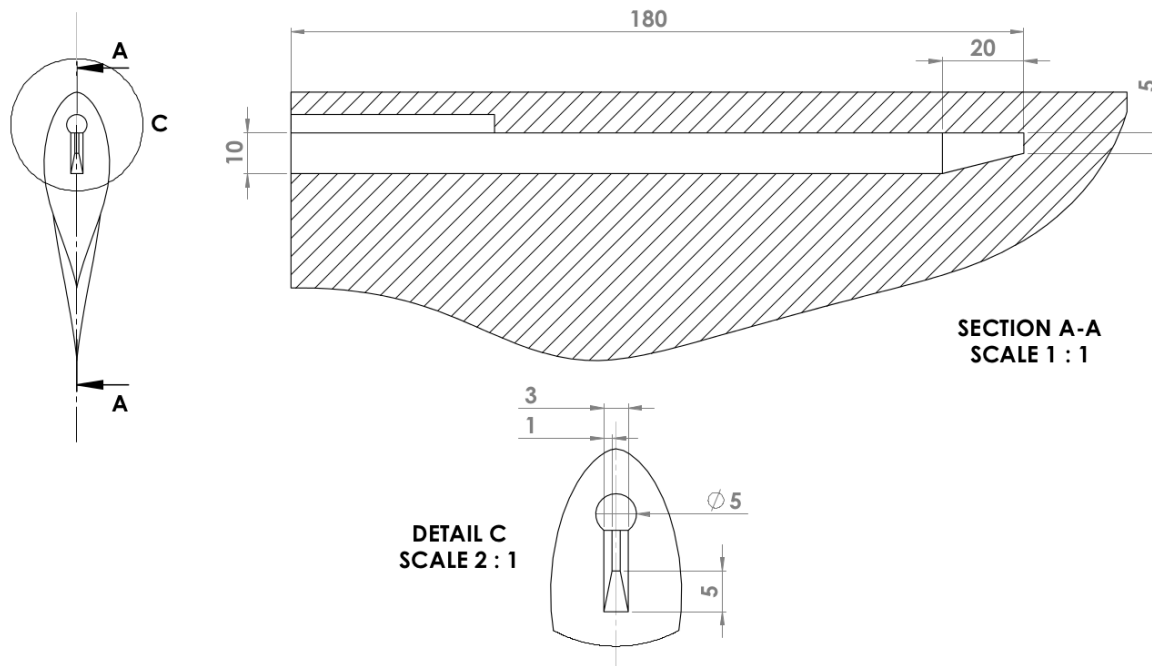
Drawing of the flipper with cut outs for the endoskeleton and attachment rod.
